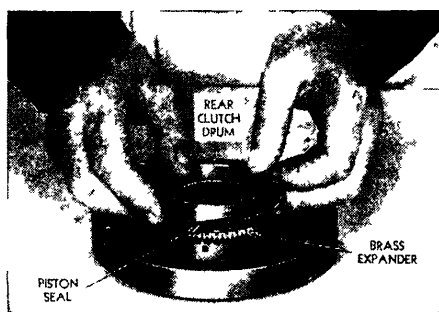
Install new rubber seal over brass expander in same manner as for front unit clutch drum except that the lips of seal and brass expander must face downward. Install new rubber seal and brass expander in piston with lips up
